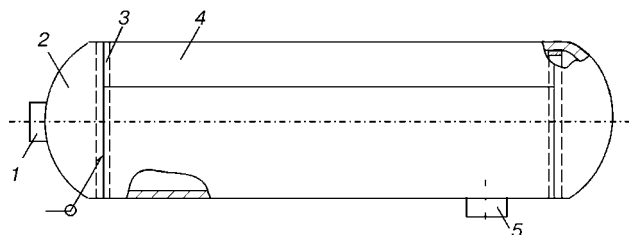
Scheme of tank division into design elements: 1, 5 – pipe connections; 2 – bottom; 3 – backing ring; 4 – shell
